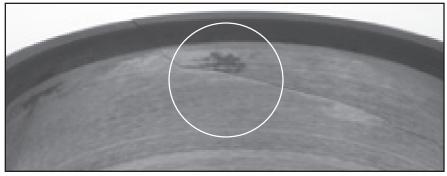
This ball bearing inner ring fracture is a result of being installed on top of a metal contaminant or raised metal nick.
